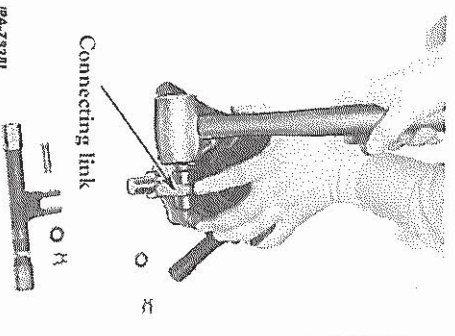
Installing Camshaft Connecting Link Pin (Long)
